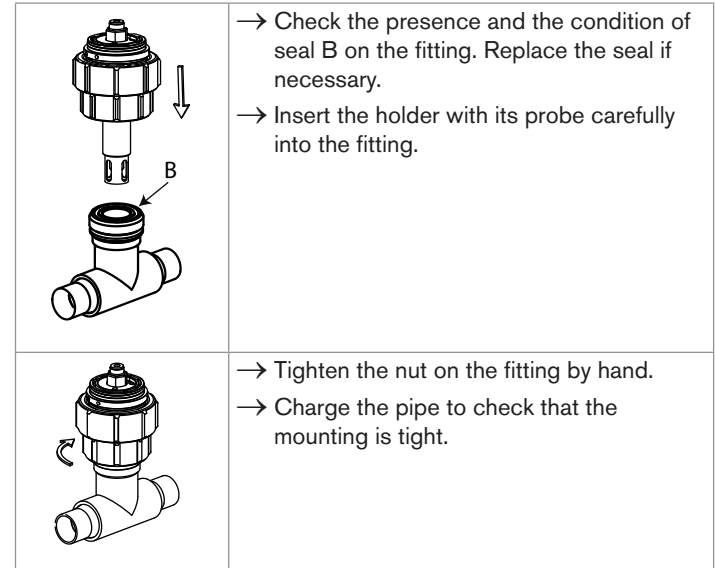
Installing the sensor holder with its probe on a fitting (8202)
